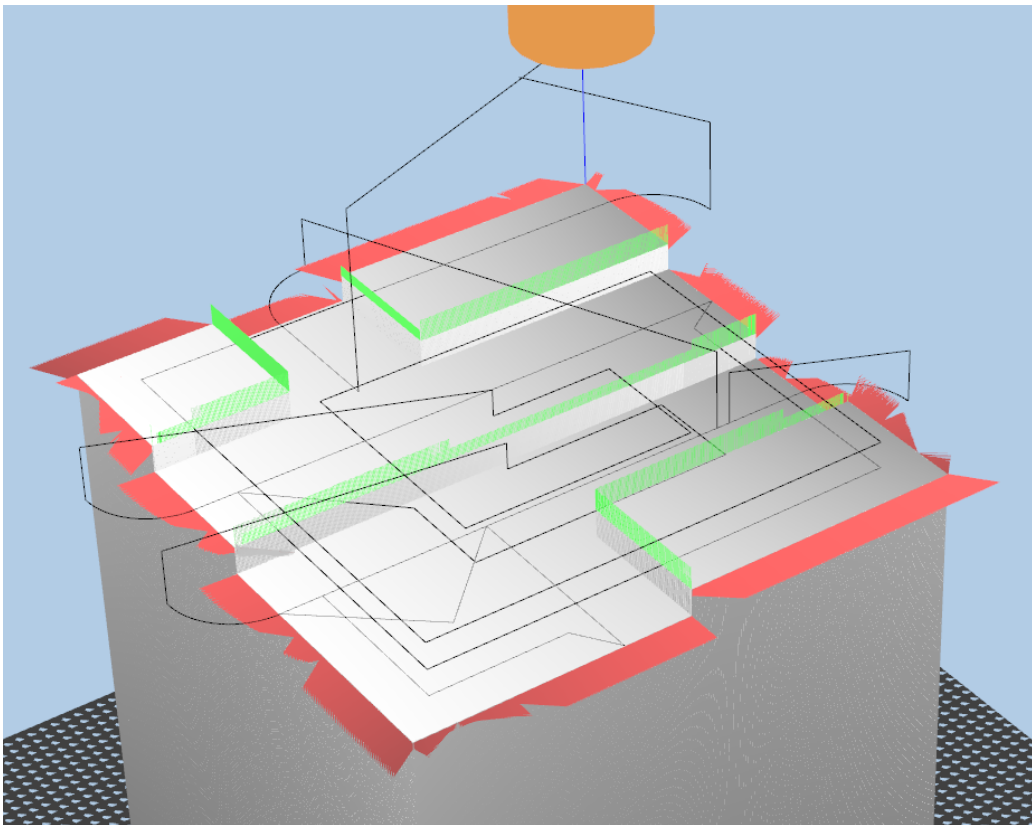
Tool path C in up milling (burr height = 1500 μm).
